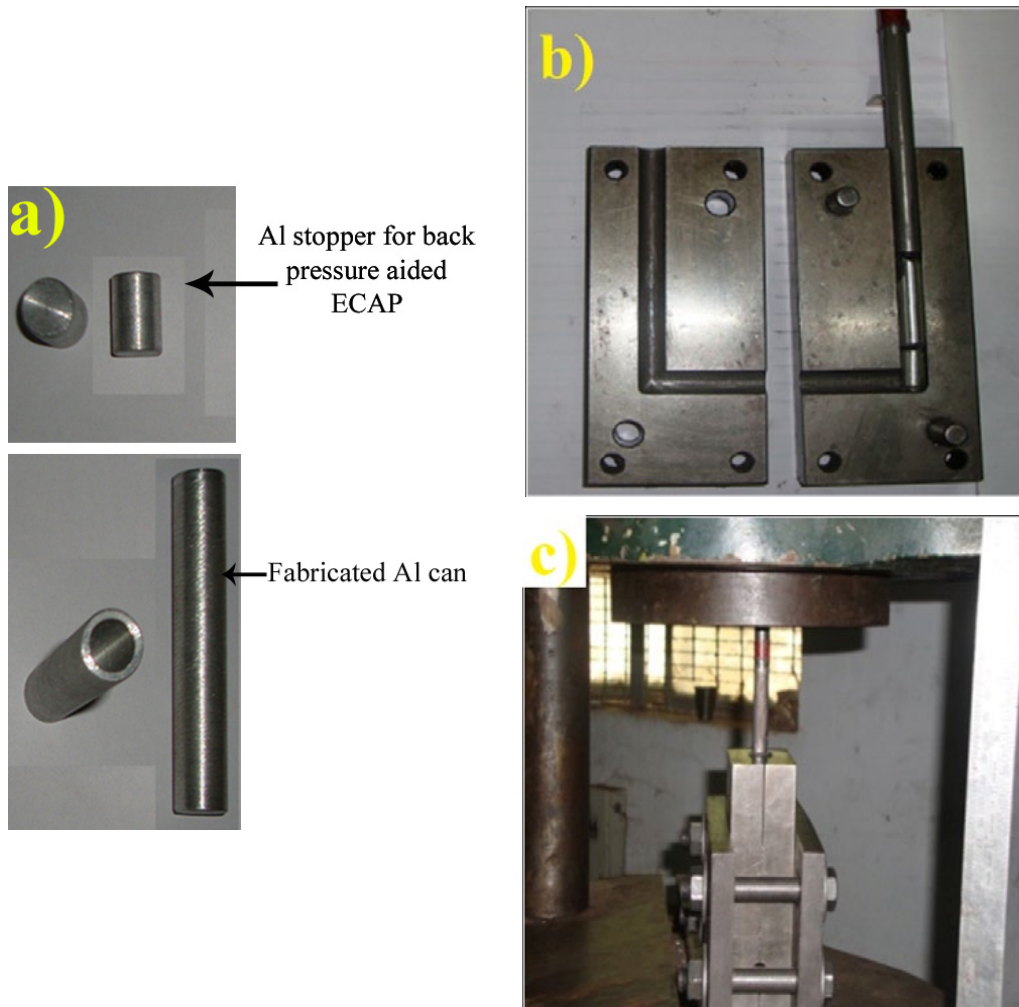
(a) Fabricated Al can and back pressure system, (b) ECAP die setup, (c) ECAP die loaded under universal testing machine
